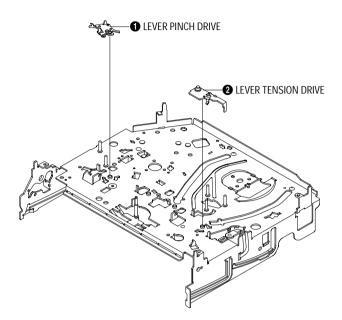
Lever Pinch Drive, Lever Tension Drive Removal
